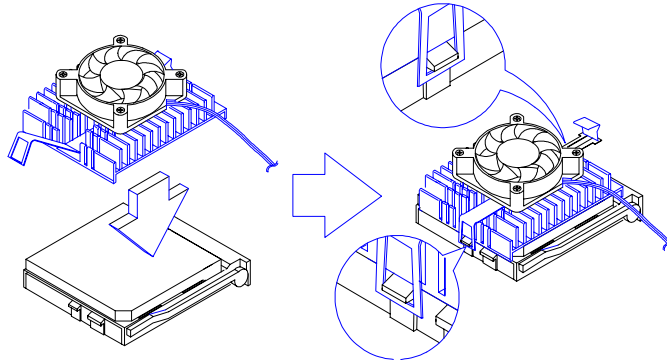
Attaching the Heatsink and Fan to the CPU
